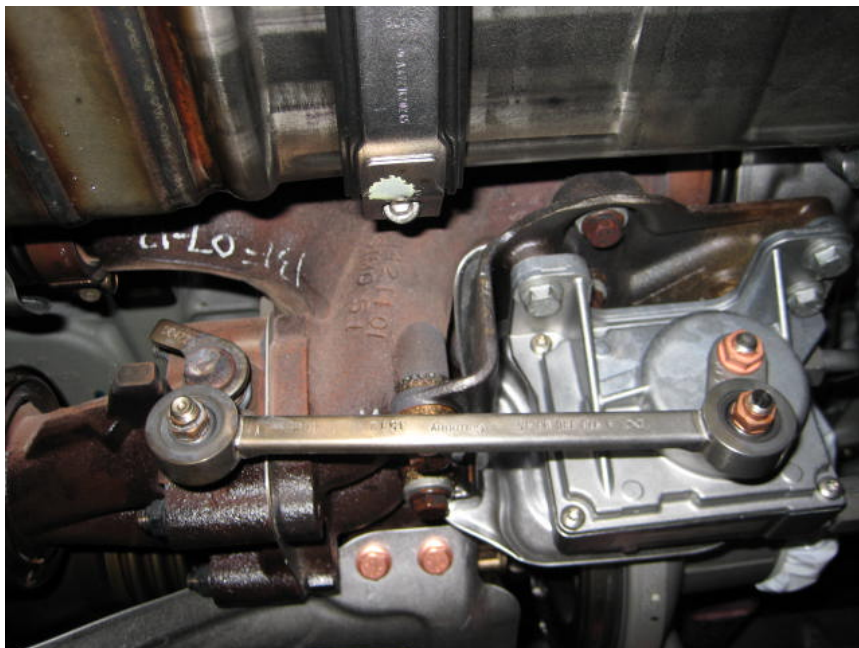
DD15TC (472909) and DD16 System, Pull rod P/N Located on Top
